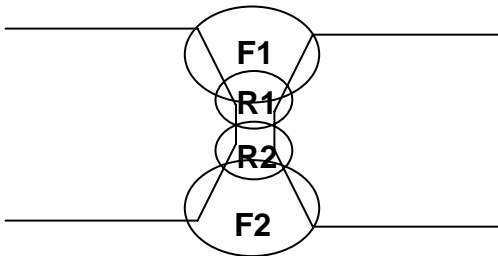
Experimental Root & Filler Weld Passes.
